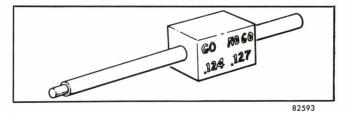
Turbine Blade Pin Hole Gage No. 3654, 3655, 3656, 3657, 3670, and 3671
